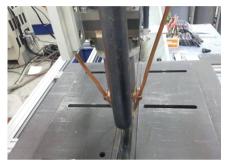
Experimental setup for laser stitch welding
